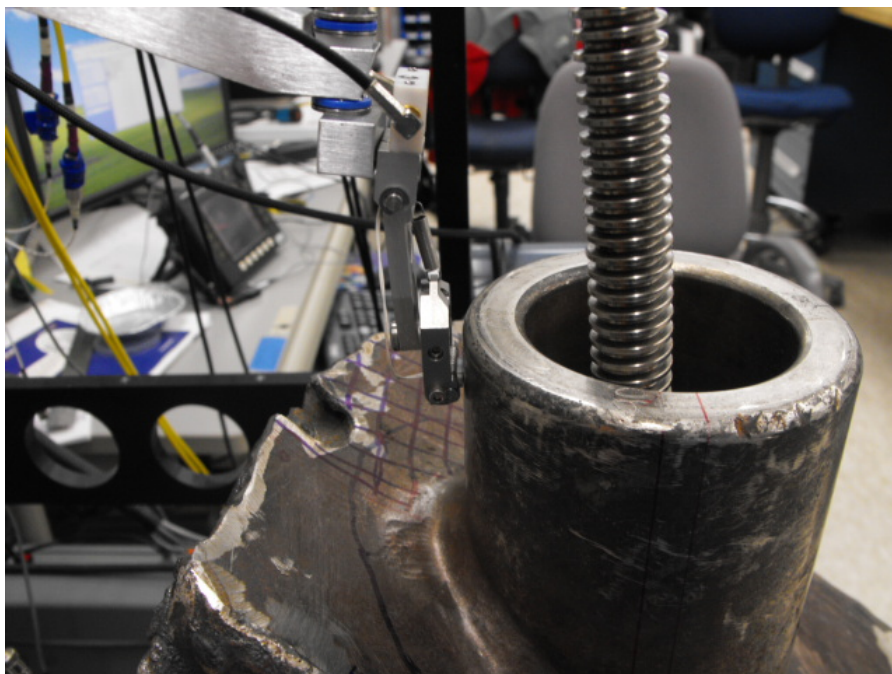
CRDM Nozzle OD and Top of Fillet Weld Examination Using WesDyne Probe
